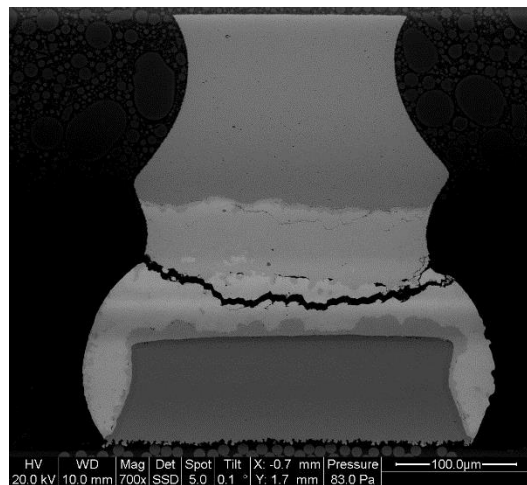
shows failed SAC305+0.05%Mn solder joints in QFN44 and R2512 packages. Figure 10-20 (a) and Figure 10-20 (b) show the solder joint of failed QFN44 in mechanical shock after 1000 hours of aging at 200°C. During failure analysis, an interesting finding was observed for Low Mn solder. Two types of failure modes were found for Low Mn solder in QFN44 package. The first one was pure interfacial failure as shown in Figure 10-20 (a). This failure mode was similar to as observed in SAC305 solder. Second type of failure mode was mixed mode where a crack propagated through the interface and solder bulk. The failure caused by mixed mode is shown in Figure 10-20 (b). For Low Mn solder, only a few solder joints showed the mixed type of failure mode. Most of the solder joints failed by pure interfacial failure. It is important to note that mixed mode failure indicates a stronger interface. A crack takes a longer time to propagate for mixed mode compared to pure interfacial mode and thus the solder joint can last longer. The evidence of mixed
